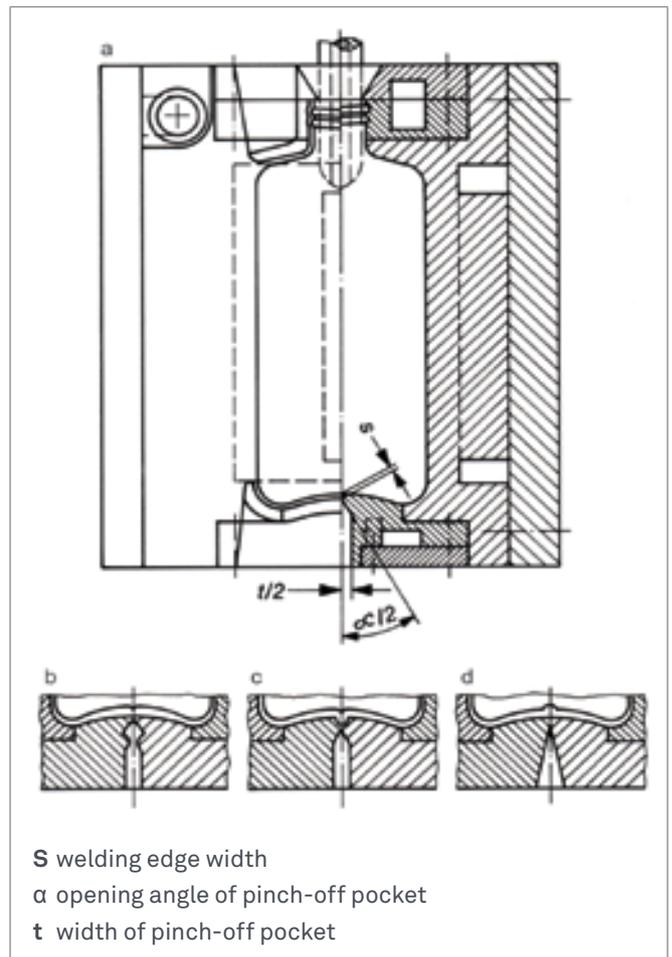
d: Design of Welding Edges and Pinch-off Pockets
